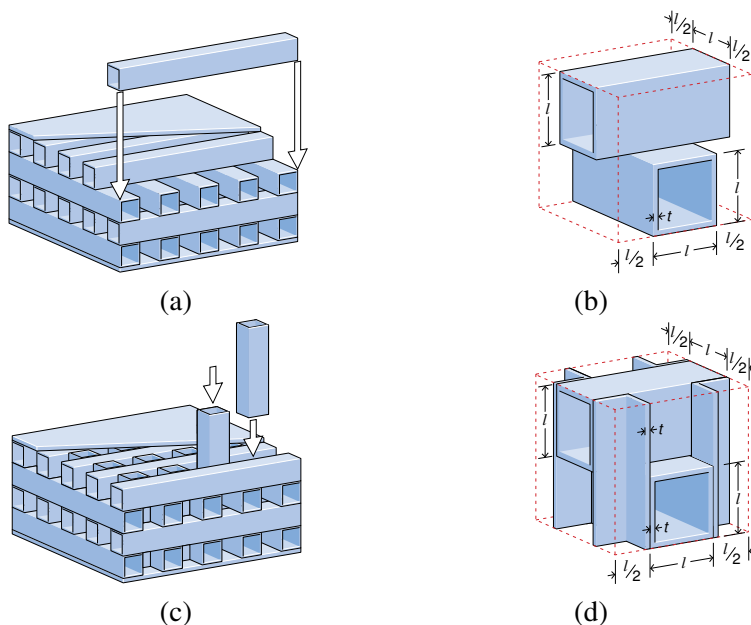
Examples of cellular structures fabricated from square extruded tubes. (a) 2D structure made by bonding 0/90 layers of colinear tubes. (b) The unit cell of the 2D structure. (c) A 3D tube structure where the through thickness gaps in the 0/90 assembly are filled with vertical tubes. (d) Unit cell of the 3D tube structure.
